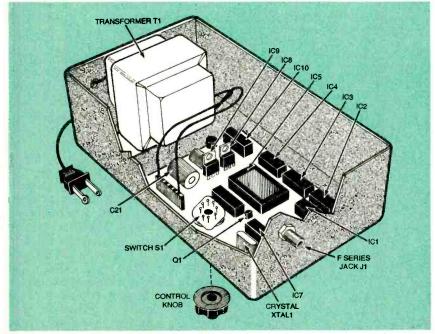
ASSEMBLY DIAGRAM of the completed Video Pattern Generator. The power supply is located within the project case. The switch knob is attached to the PC board-mounted switch on the bottom of the case.
